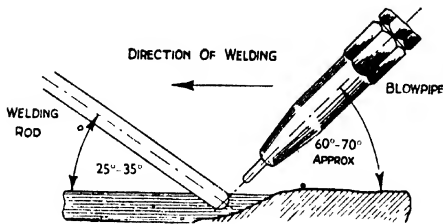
(above).—ANGLES OF ROD AND BLOWPIPE FOR DOWNHAND WELDING COPPER BY THE LEFTWARD METHOD (*The British Oxygen Co., Ltd.*)
